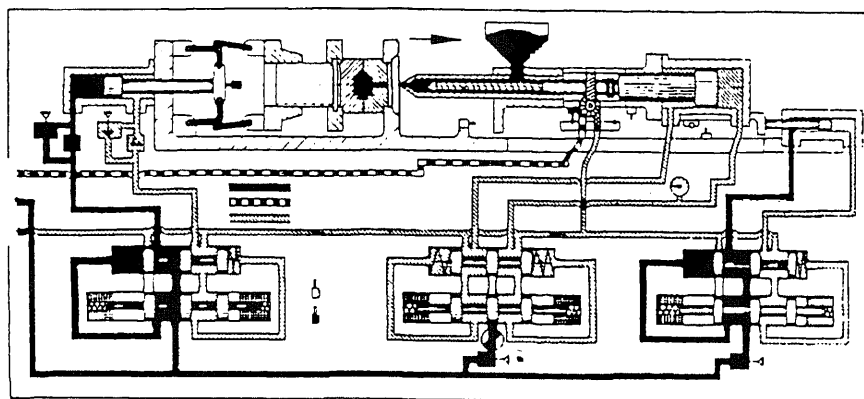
The screw chamber is still charging; the plasticating unit starts to move away from the sprue bushing.
